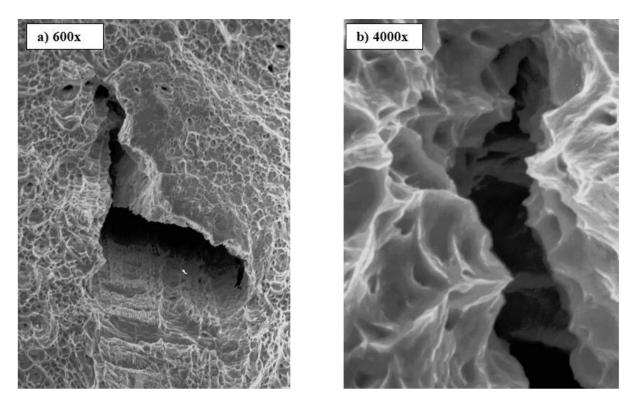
Ductile fractures with hot cracks of industrial bronze CuSn6 from extreme strip segments after hot rolling, b) magnification of a)
